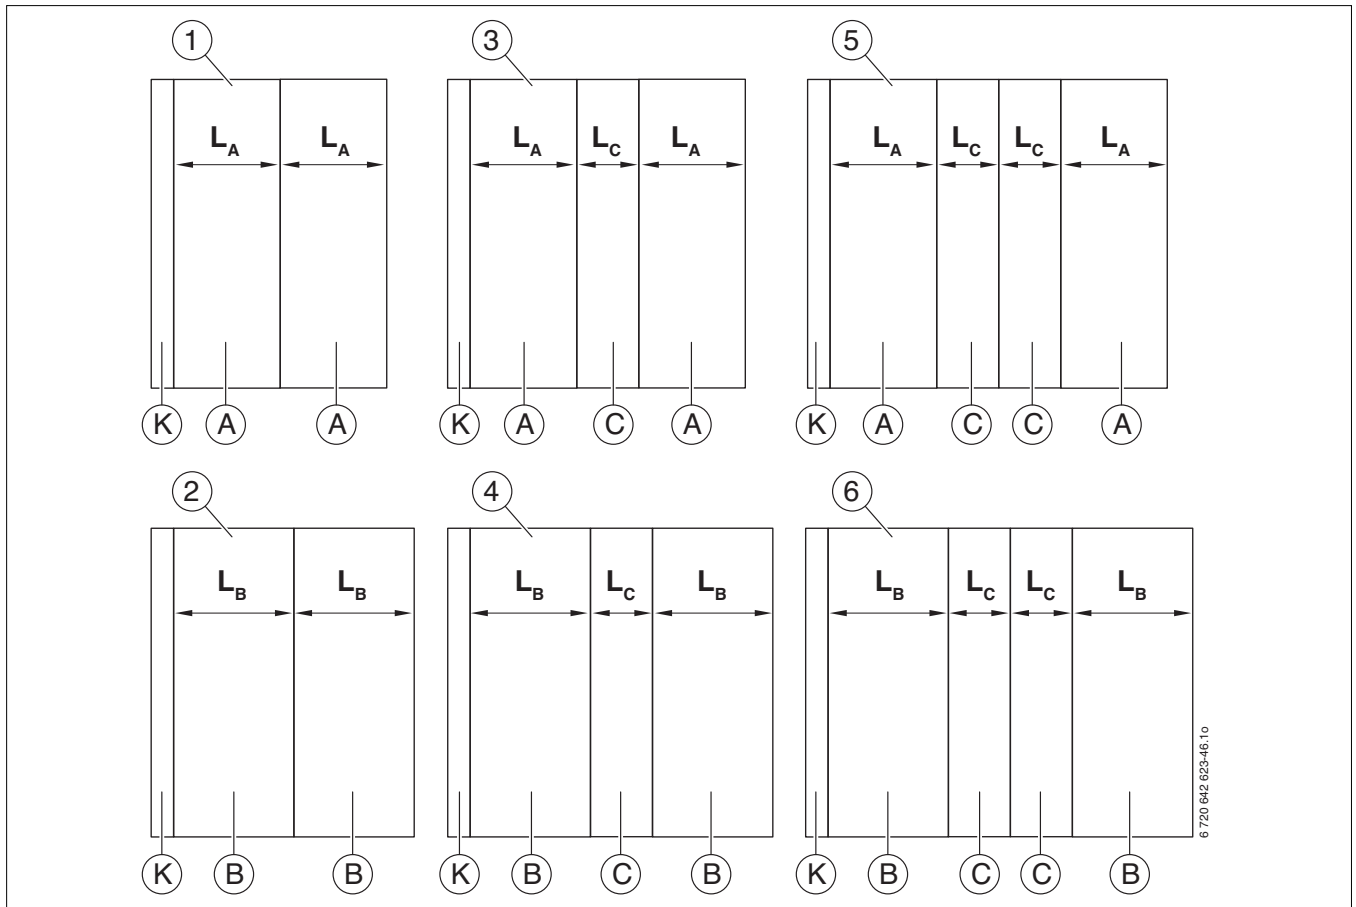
Arrangement of side panels for the various boiler sizes (dimensions in inches (mm))
